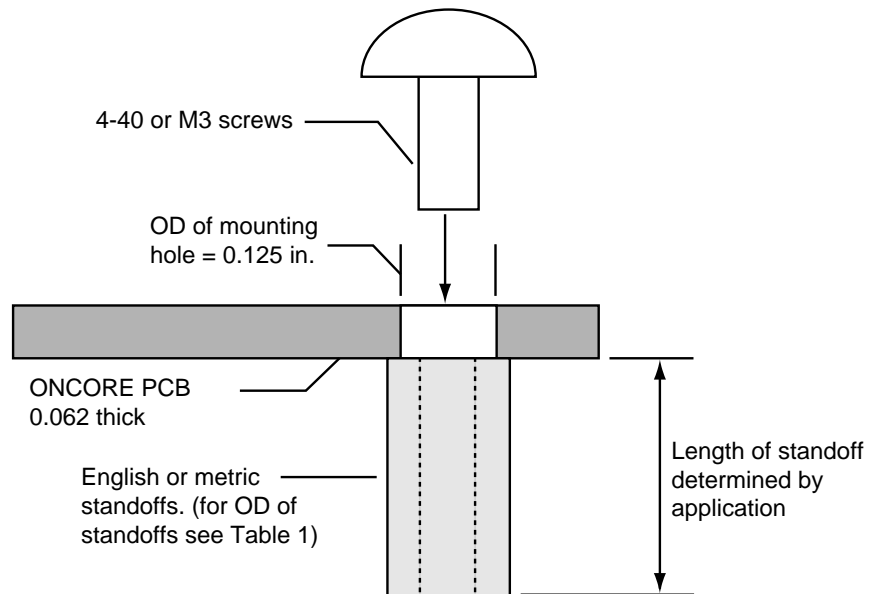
Layout of the Oncore PCB cross section with reference to the standoff and screw
